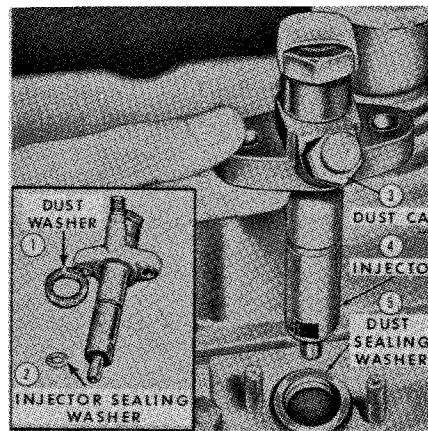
Cap or plug all openings when removing injector assembly. Dust washer (1) keeps dirt out of injector bore in cylinder head. Be sure seat in bore is clean and install sealing washer (2) when reinstalling injector.
